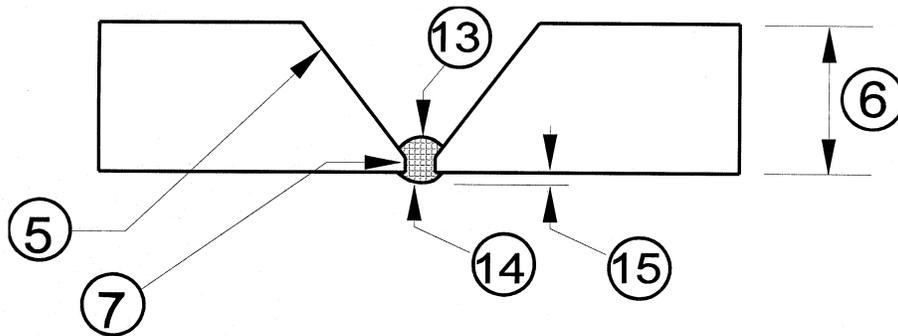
Tack weld and Root Weld Terminology
